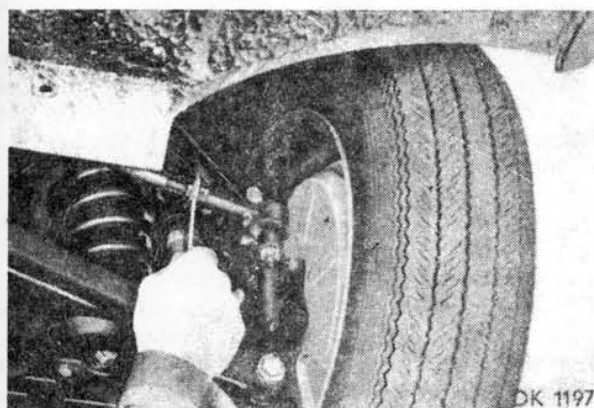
/6 - Adjusting Front Wheel Toe-in by Rotating the Steering Rods
